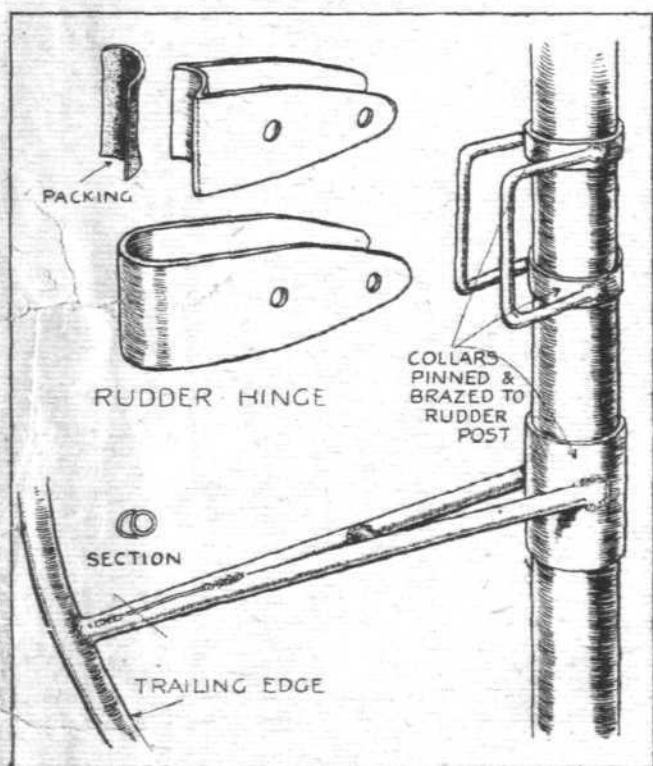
The rudder of the Pfalz is built up of steel throughout. The sketches show the main features of the detail construction.
